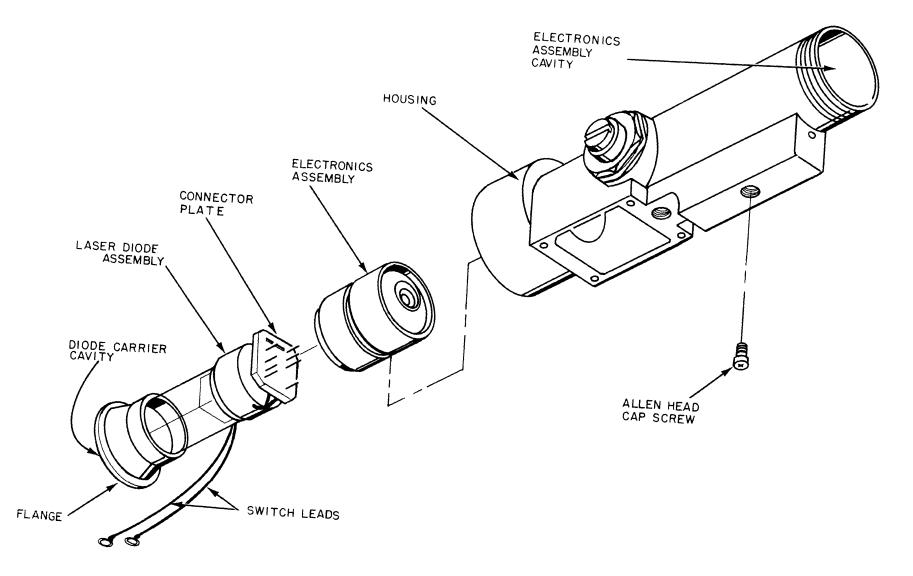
Removal and replacement of electronics and laser diode assemblies.
